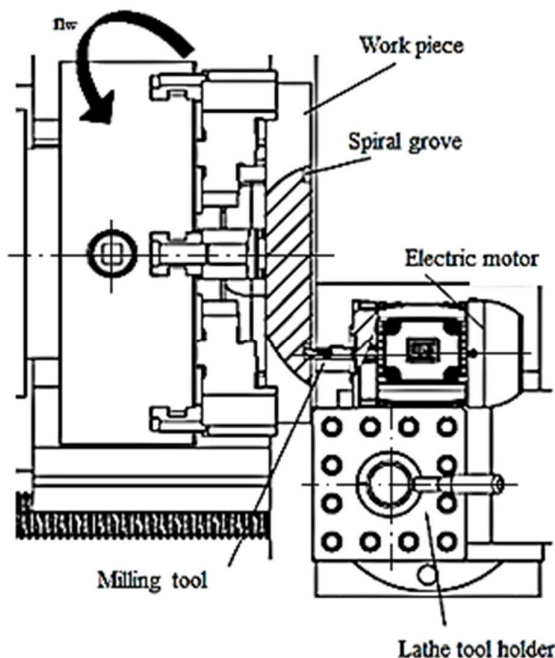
Machining a spiral groove on the flat surface of a disc-type workpiece using a device with a finger milling tool on a universal lathe.
